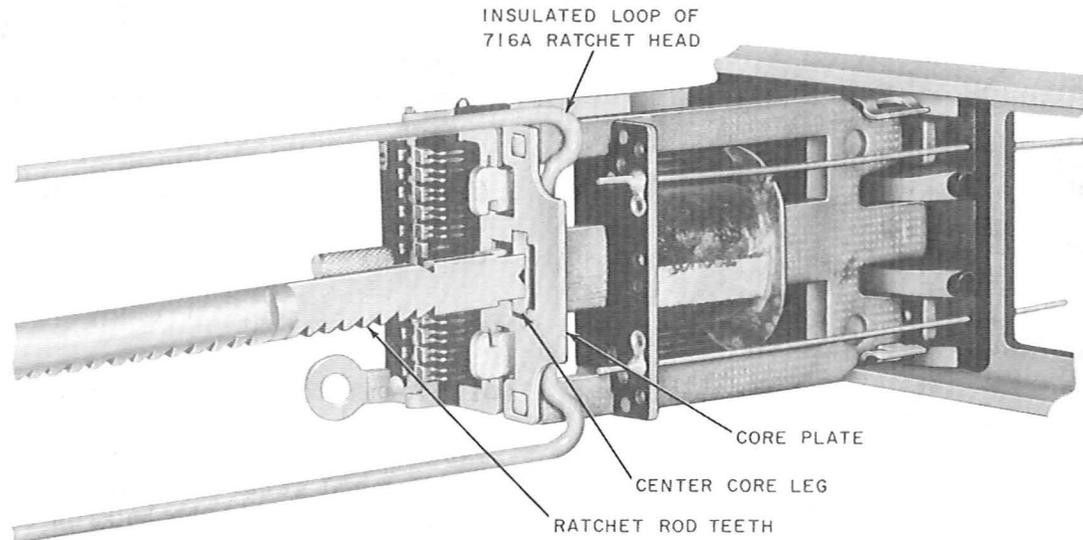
12-Position Relay—Card Removal Tools Mounted in Place
